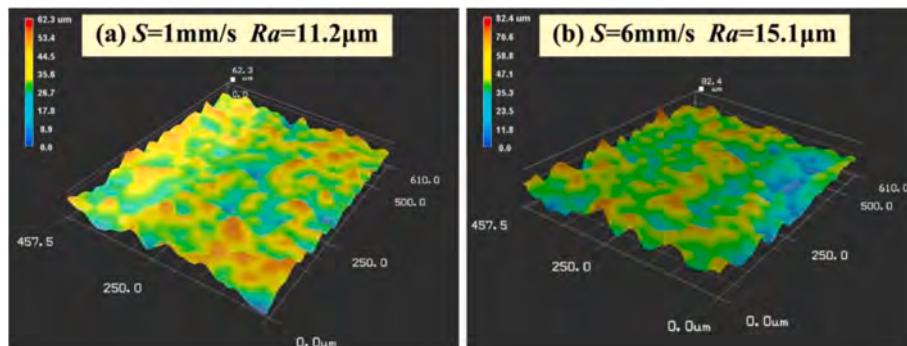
Surface topography of the printed specimens fabricated at the printing speed of a) 1 mm/s and b) 6 mm/s, respectively.
